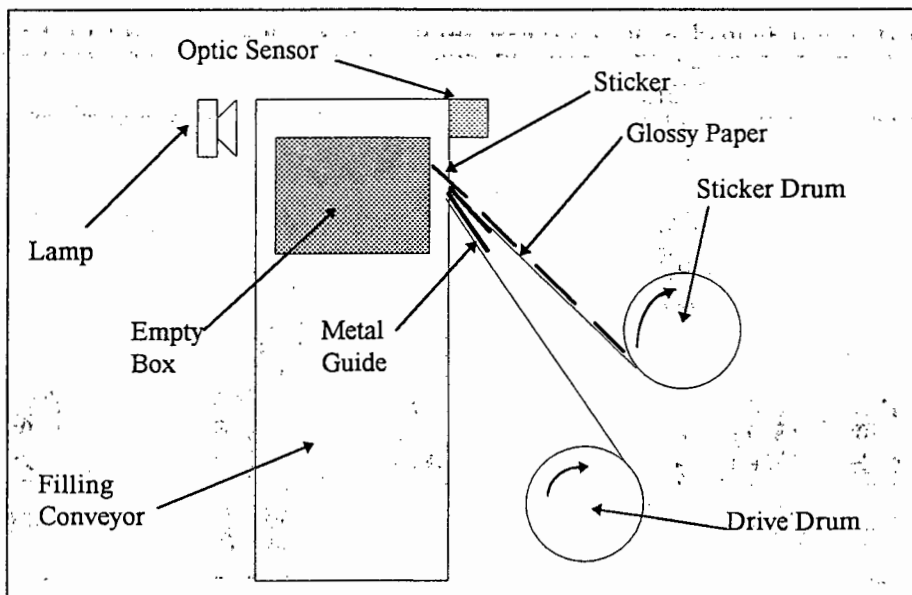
The model sticker dispenser set-up (Top View).
